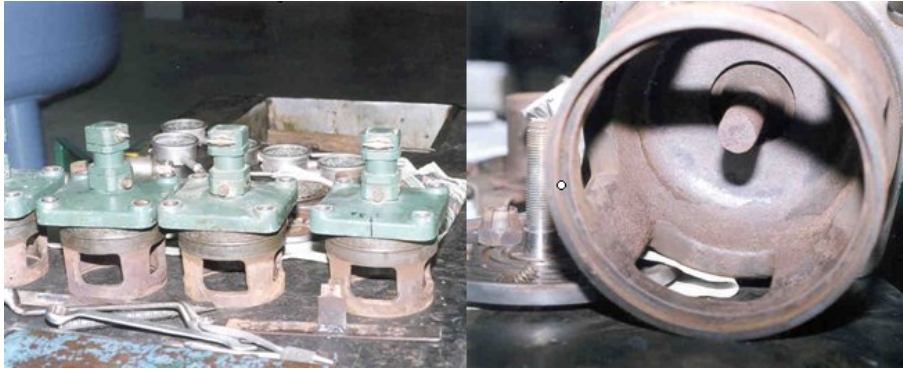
Valve casings dismantled from the V-compressor. The valve casings were covered with corrosion products.
